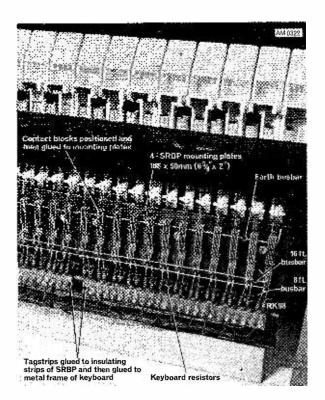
Annotated photograph of prototype organ, showing close-up view of actual keyboard wiring and switch block assemblies.
